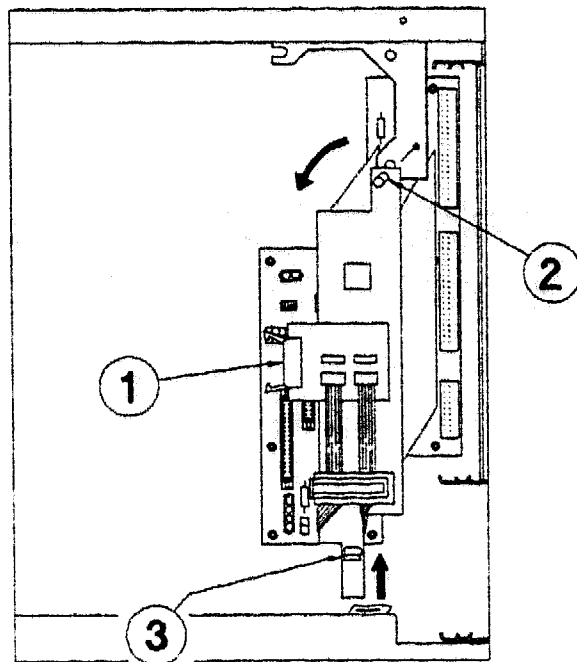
Removing the MO Drive Controller PCA Assembly
